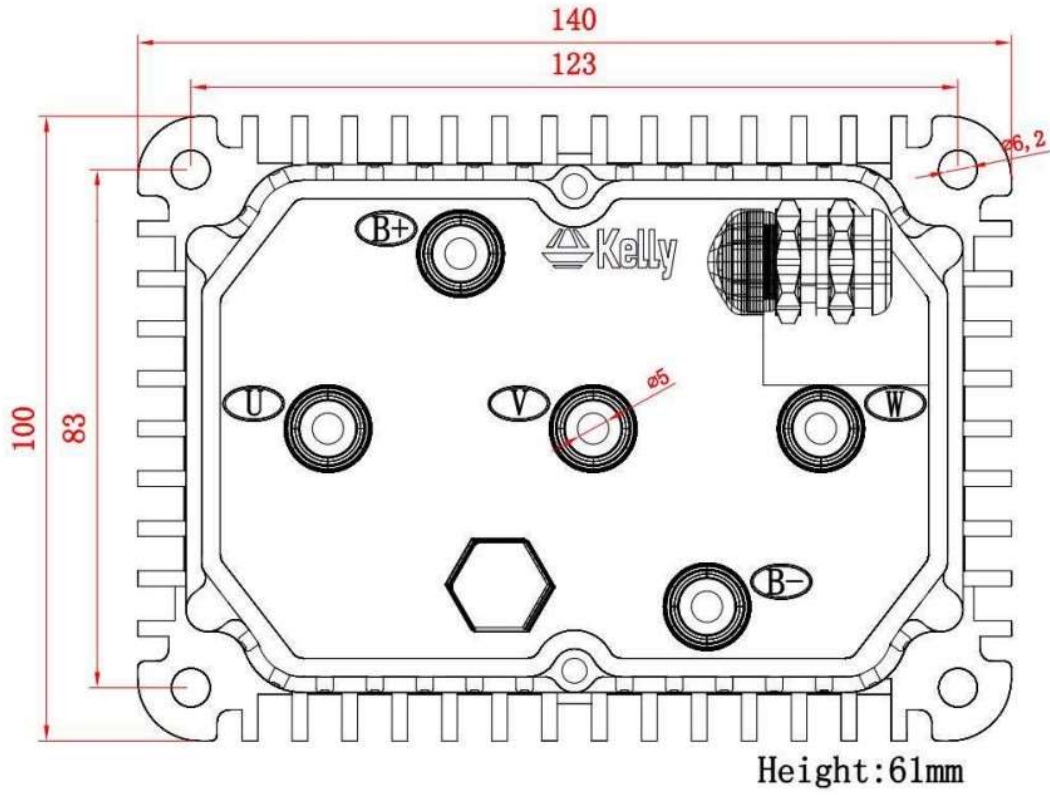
KLS2415N, KLS7215N mounting holes' dimensions
